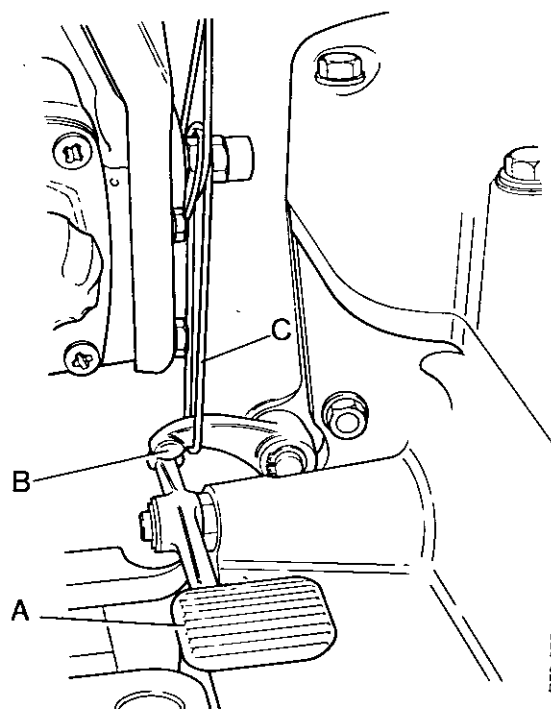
DIFFERENTIAL LOCK PEDAL HELD IN ENGAGED POSITION
